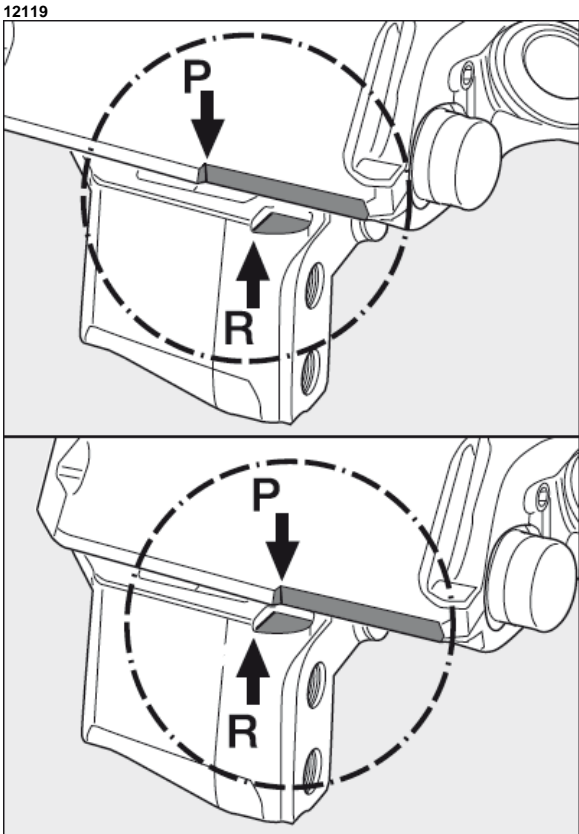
PAD WEAR CHECK FRONT AND TAG AXLE
